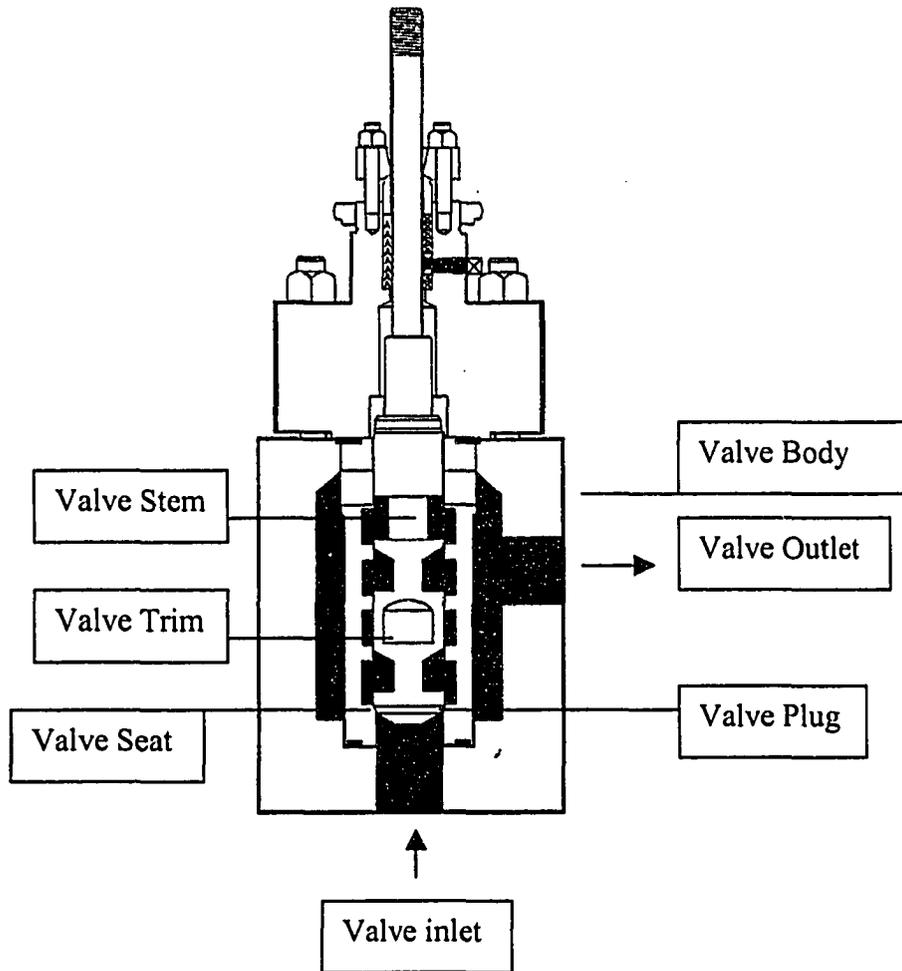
Boiler Feedwater pump recirculation valve (Masoneilan)
